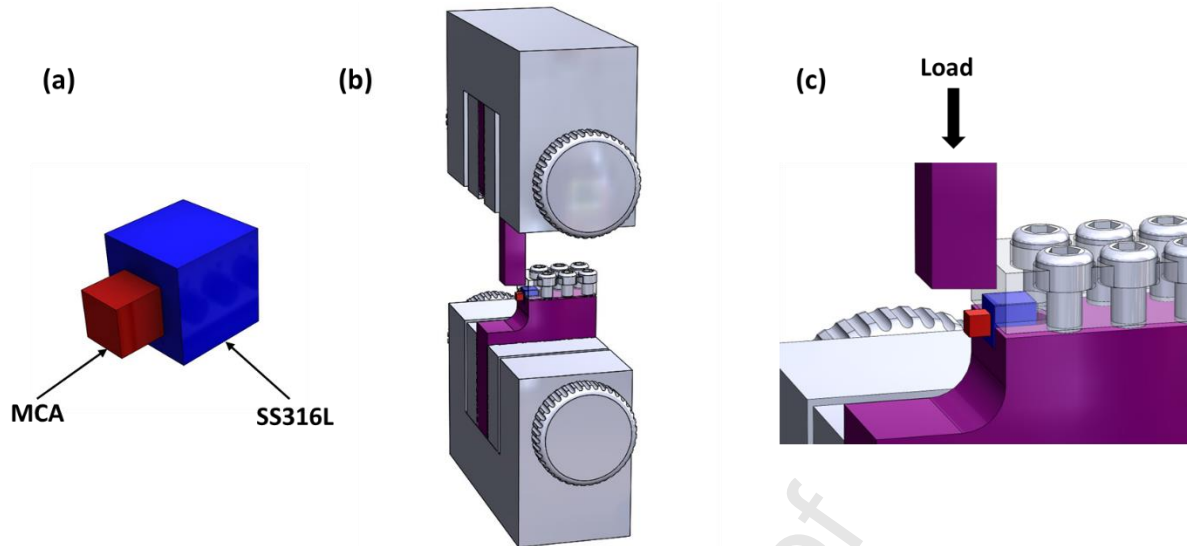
Schematic illustration of the shear test set-up, a) test specimen, b) execution of shear test on the diffusion welded sample, c) closer view of the shear test set-up
